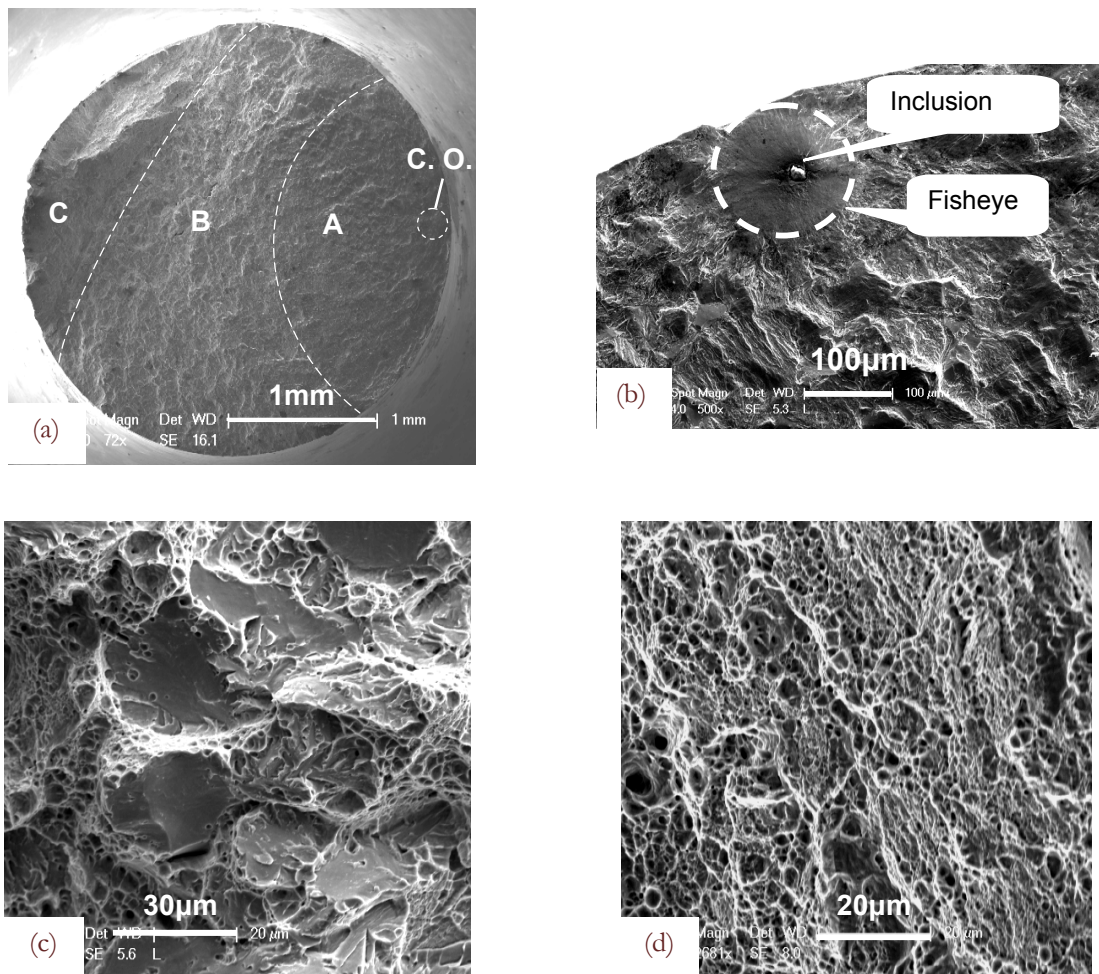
Fracture surface of a specimen tested in laboratory air, at $\sigma_{max} = 610$ MPa and $N_f = 3.27 \times 10^8$, (a) whole fracture surface (C.O.: crack origin), (b) enlargement of Region A, (c) enlargement of Region B and (d) enlargement of Region C.
